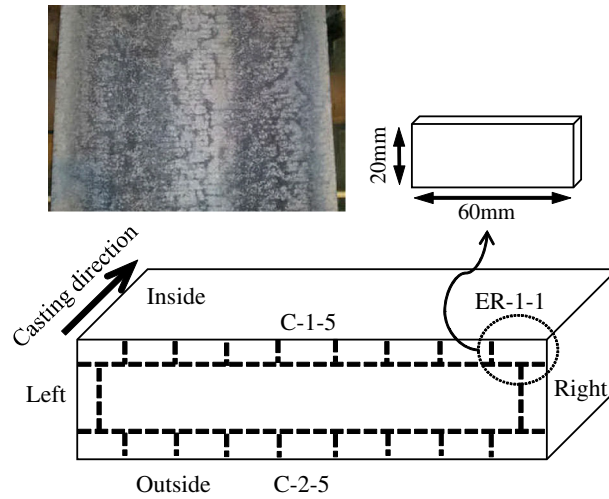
Pilot caster trial and position of sample cutting for further investigation.
